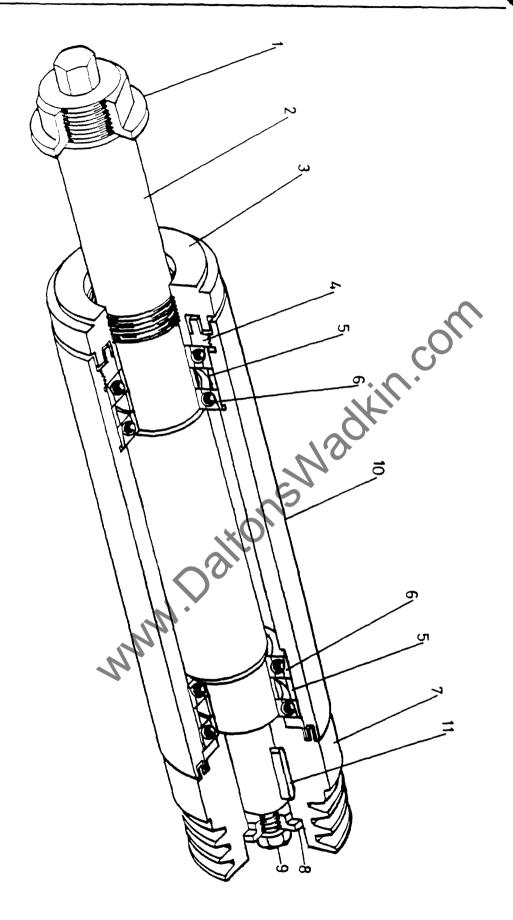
FENCE SIDE HEAD SPINDLE UNIT
